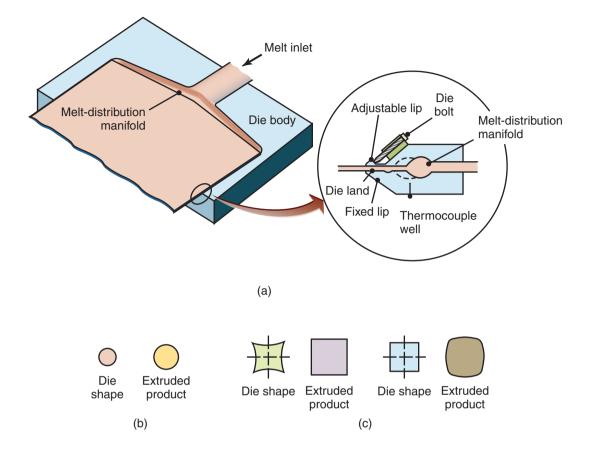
Common extrusion die geometries: (a) coat-hanger die for extruding sheet; (b) round die for producing rods; and (c) nonuniform recovery of the part after it exits the die.
